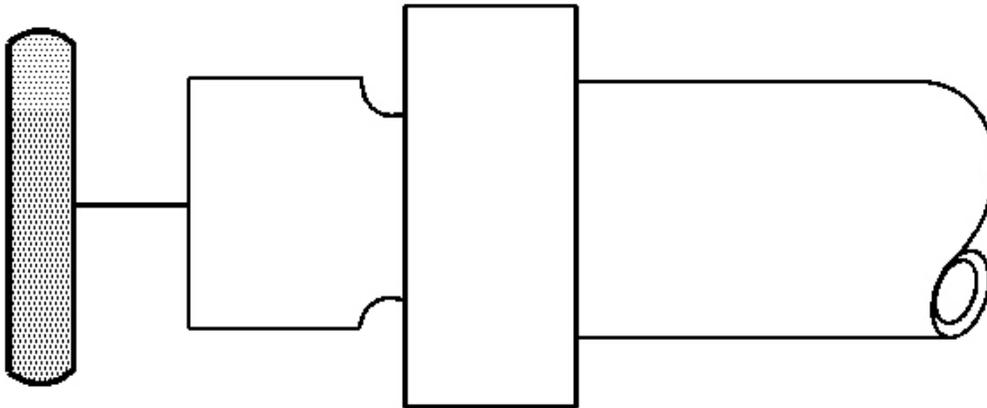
O-Ring Seal & A/C Refrigerant Component
